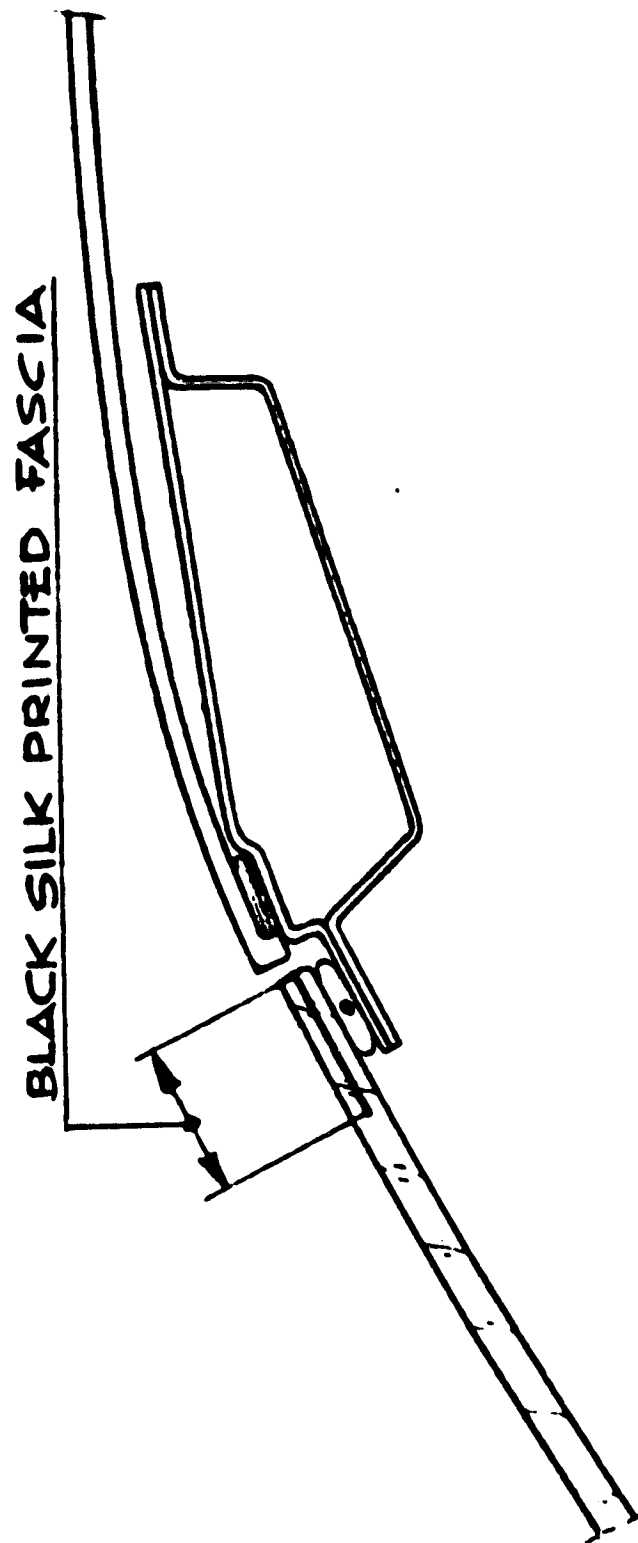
UPPER WINDSHIELD CENTER SECTION
